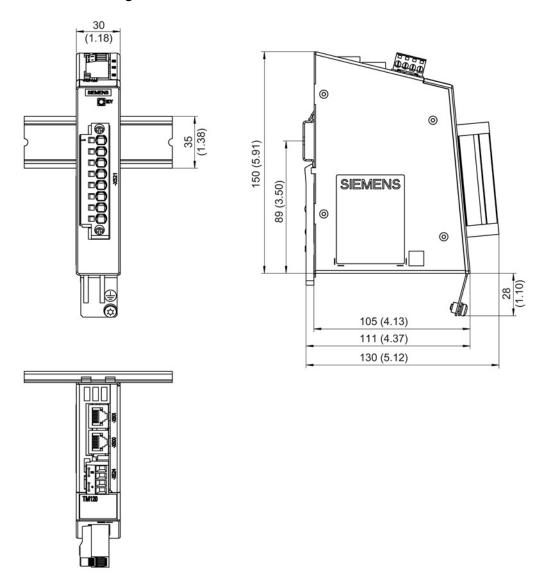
Dimension drawing of Terminal Module TM120, all data in mm and (inches)
